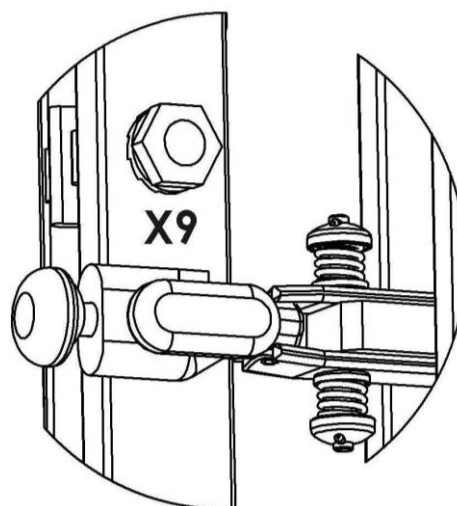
Ready-to-be-assembled position of the moving odd contacts of the selector
